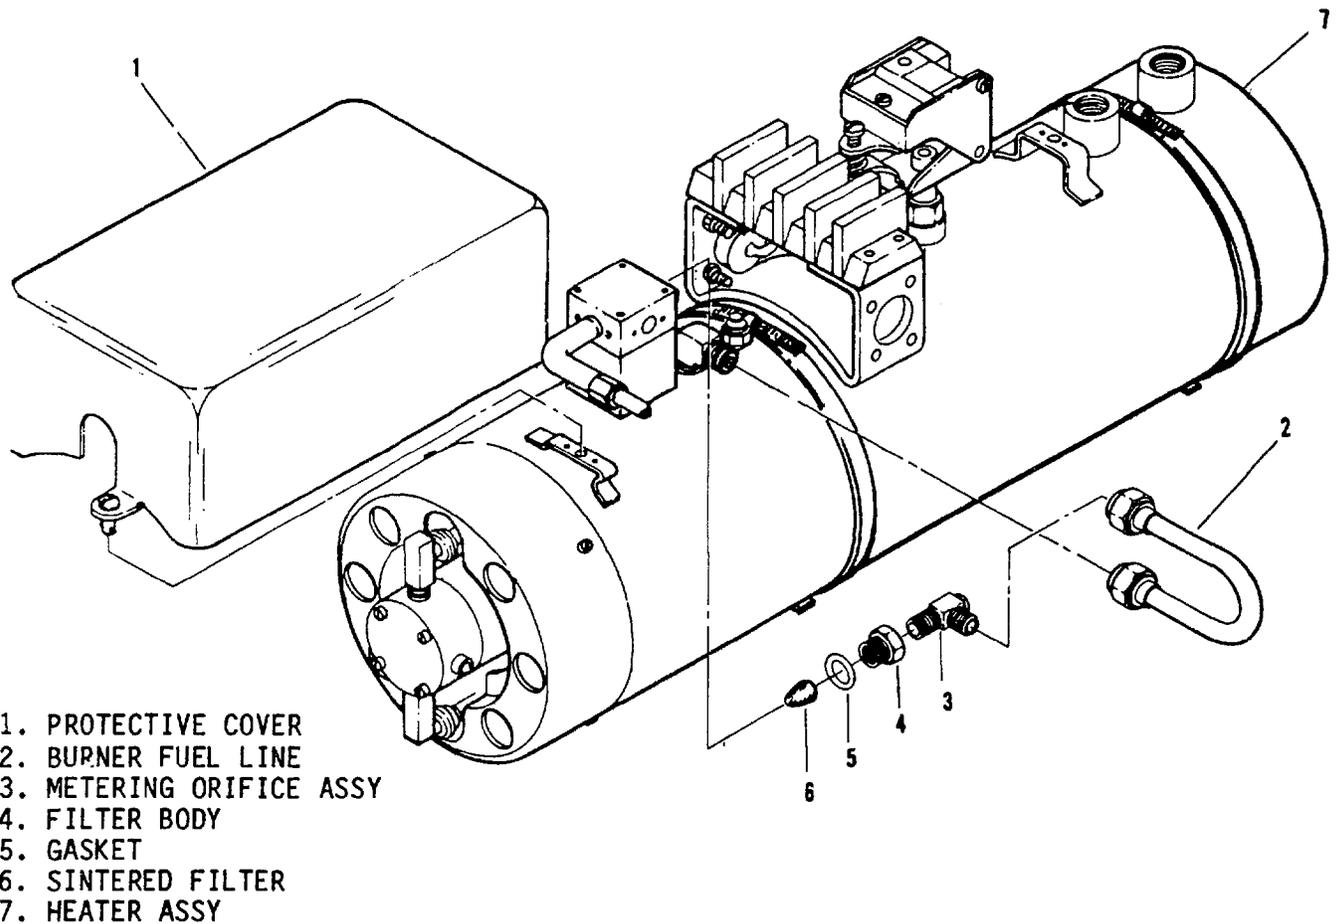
Fuel Burning Winterization Kit Heater Assembly, Service
